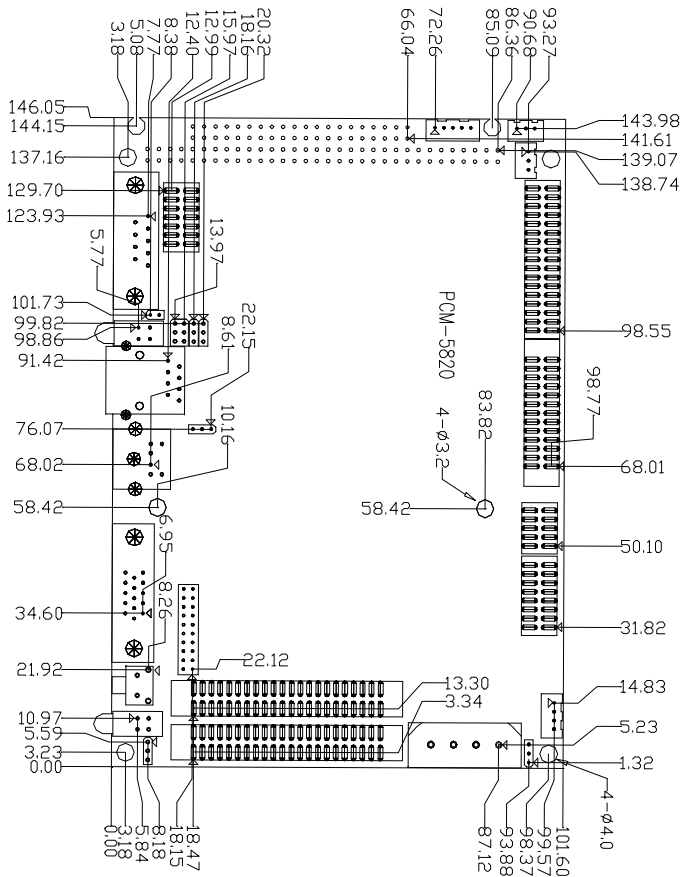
Board Dimensions component side (PCM-5820, PCM-5820L, PCM-5820E only)
